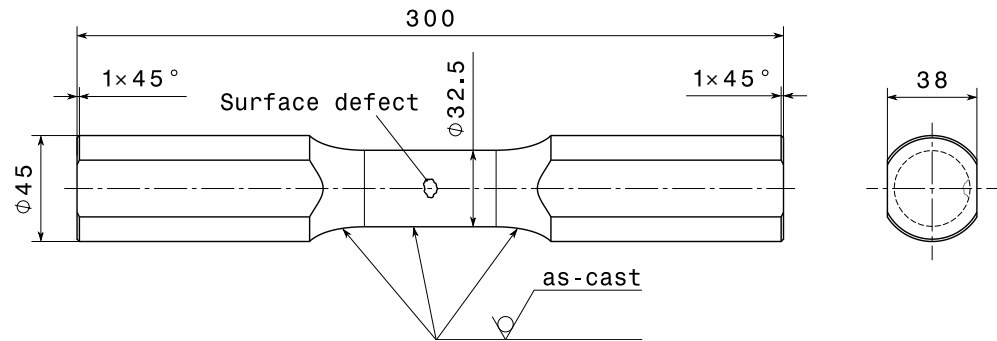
Geometry of surface defect-afflicted large-scale specimens utilised in high-cycle fatigue experiments.
